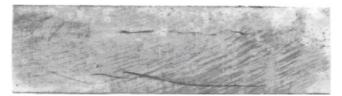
Cracks at the shell-head welded joint of the storage tank. Slika 1. Prsline u zavarenom spoju omotača-danca rezervoara
